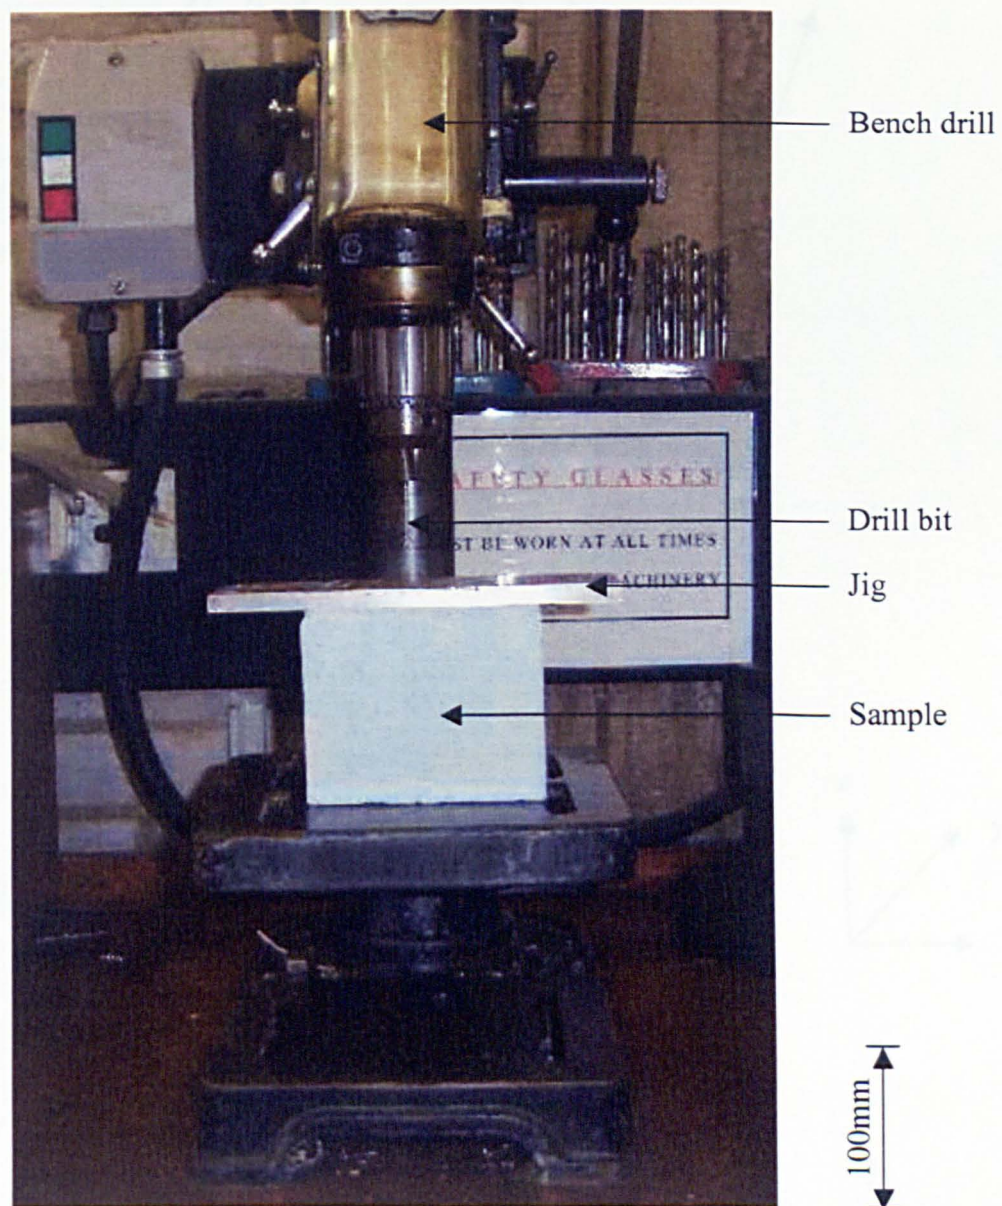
Drilling jig attached to the sample to drill holes using the bench drill
